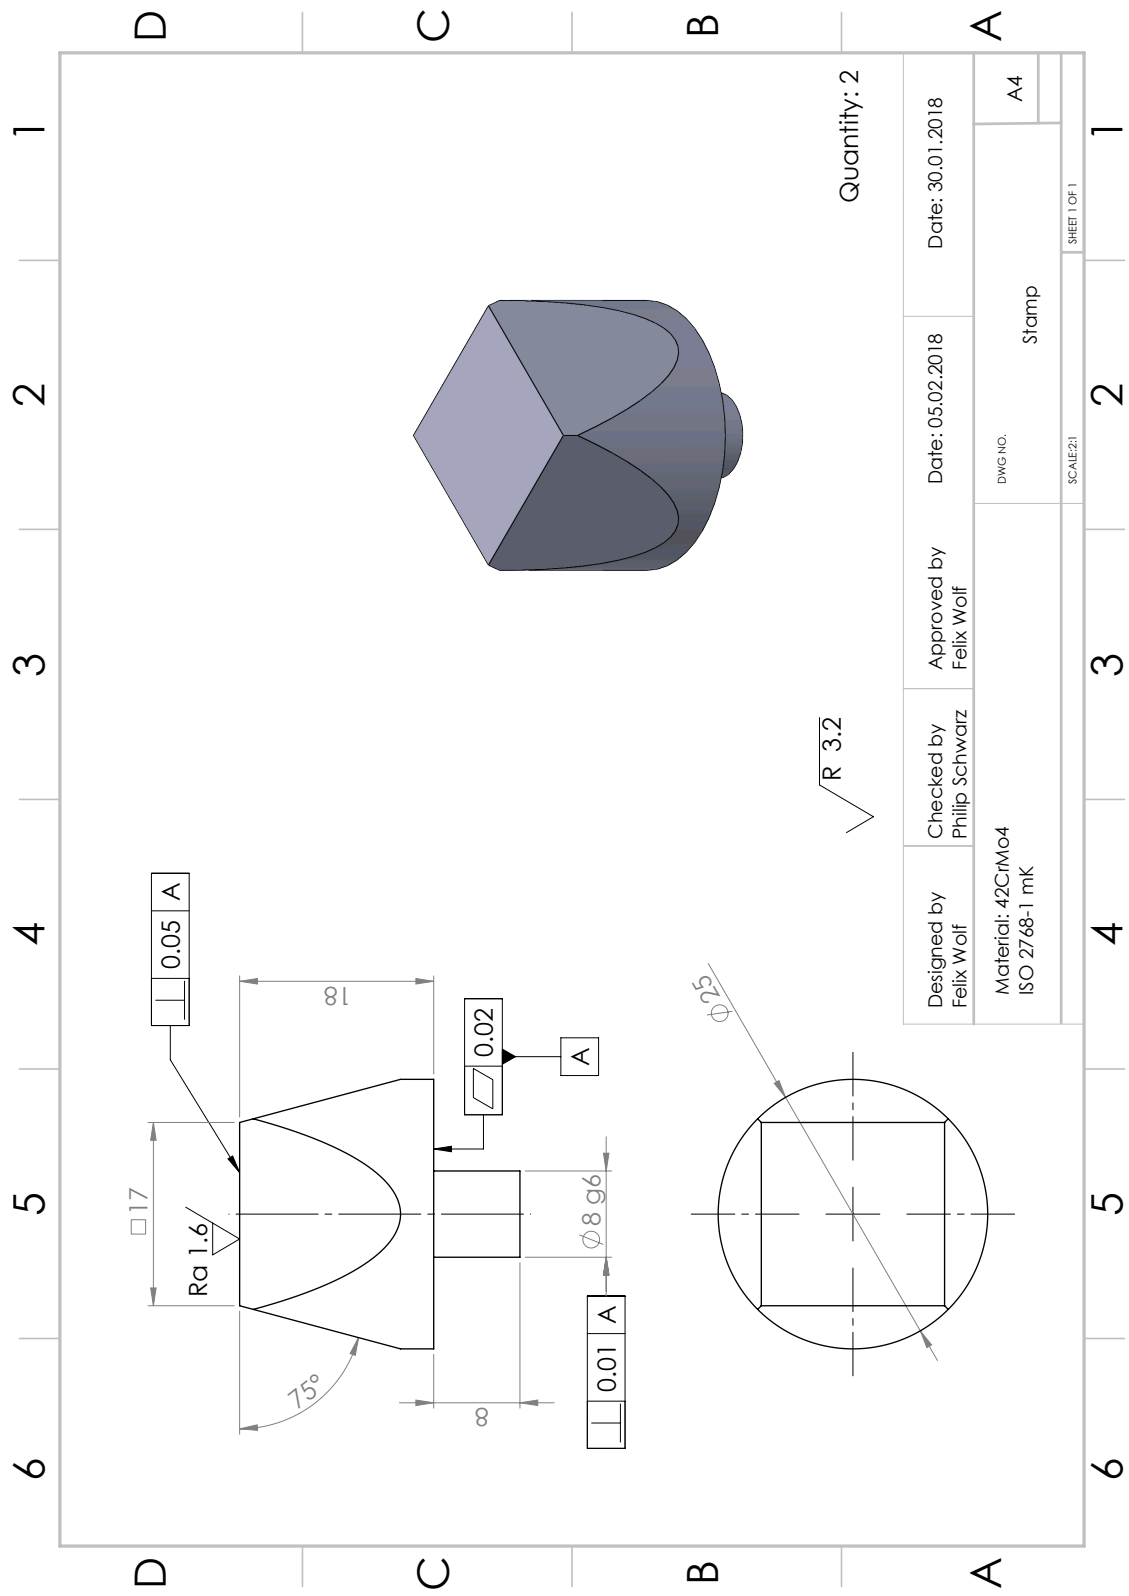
Manufacturing drawing of the stamp for the MLZ set-up.
